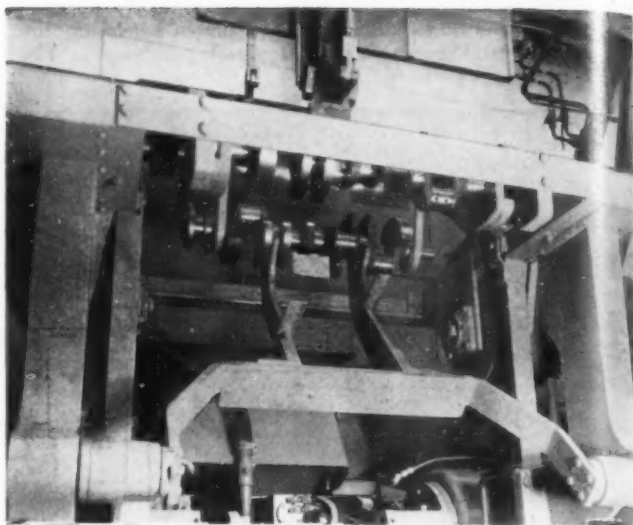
Crankshafts in the transfer intermediate station. One crank has just been removed from the work holders and another is ready to be inserted.
